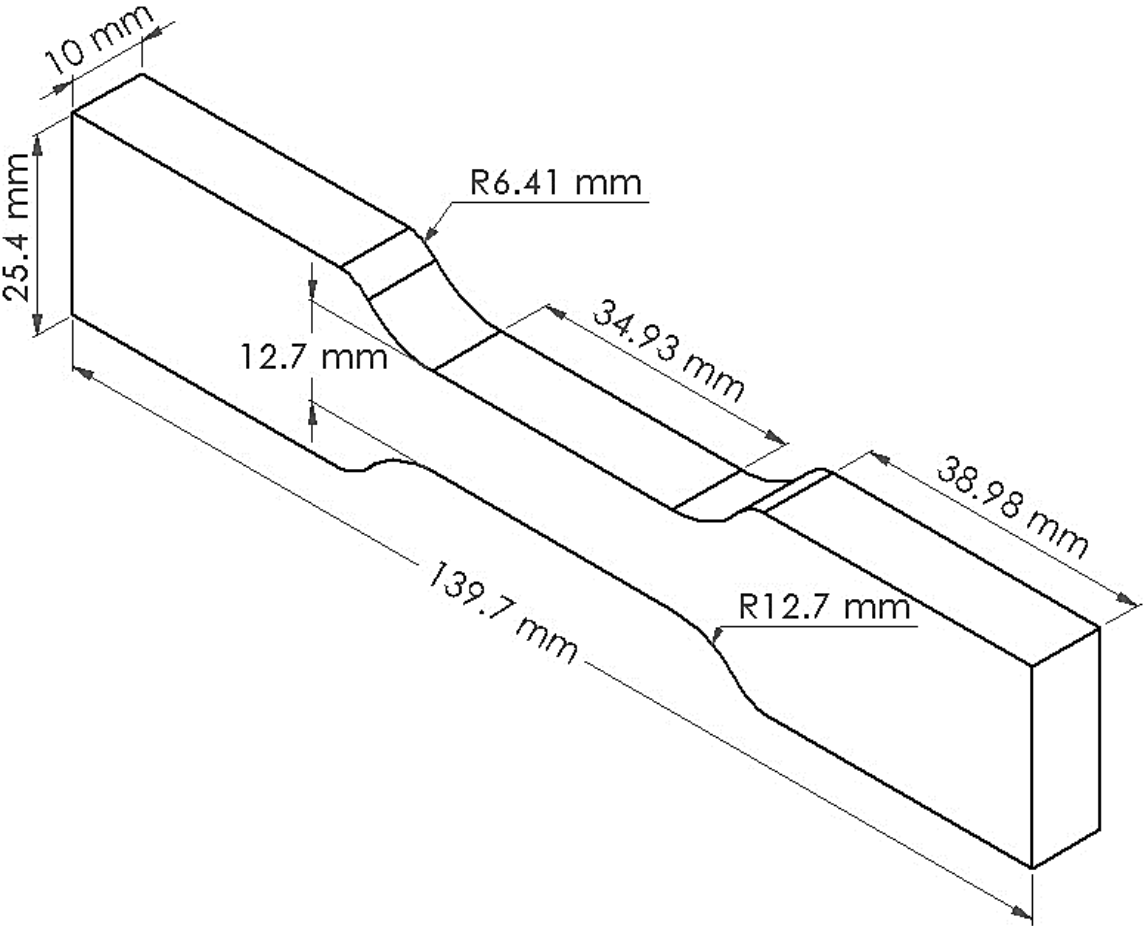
Dimensions of flat tensile HR specimens as per ASTM D3574-E standard.
